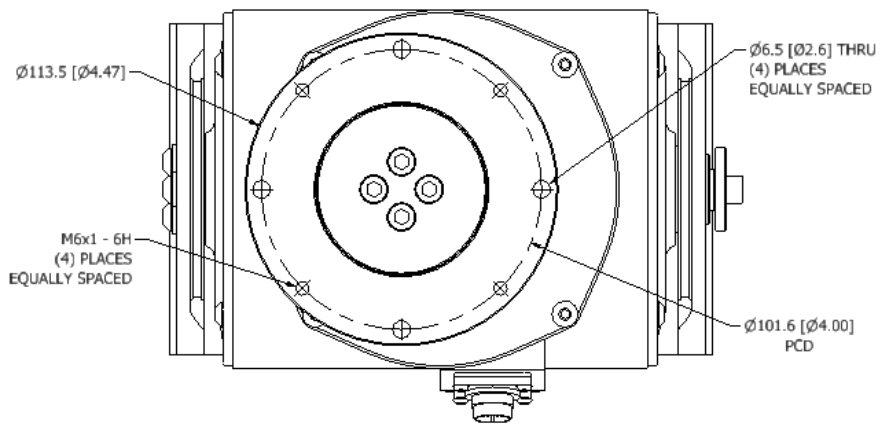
AP-30 OTT & AP-30 Side Mount Mounting Pattern (Bottom of Positioner)
